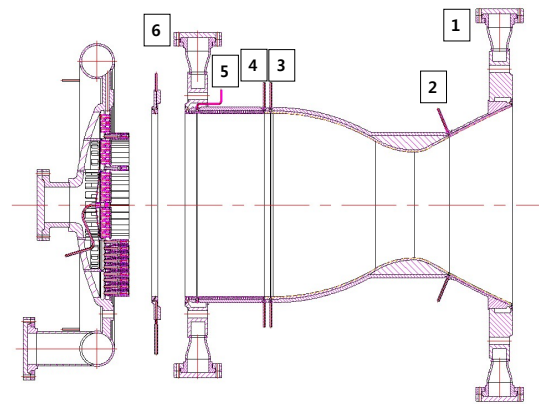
Sectioned Drawing of 75-ton-Class Channel Cooling Thrust Chamber
